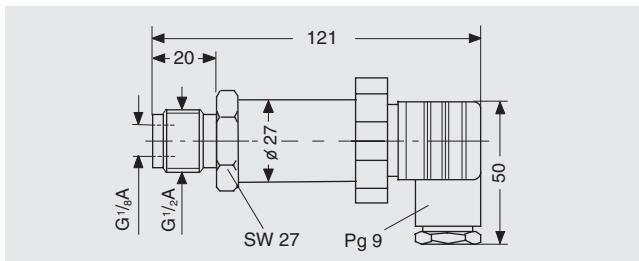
/166 Pressure transmitter 7MF1563, dimensions
